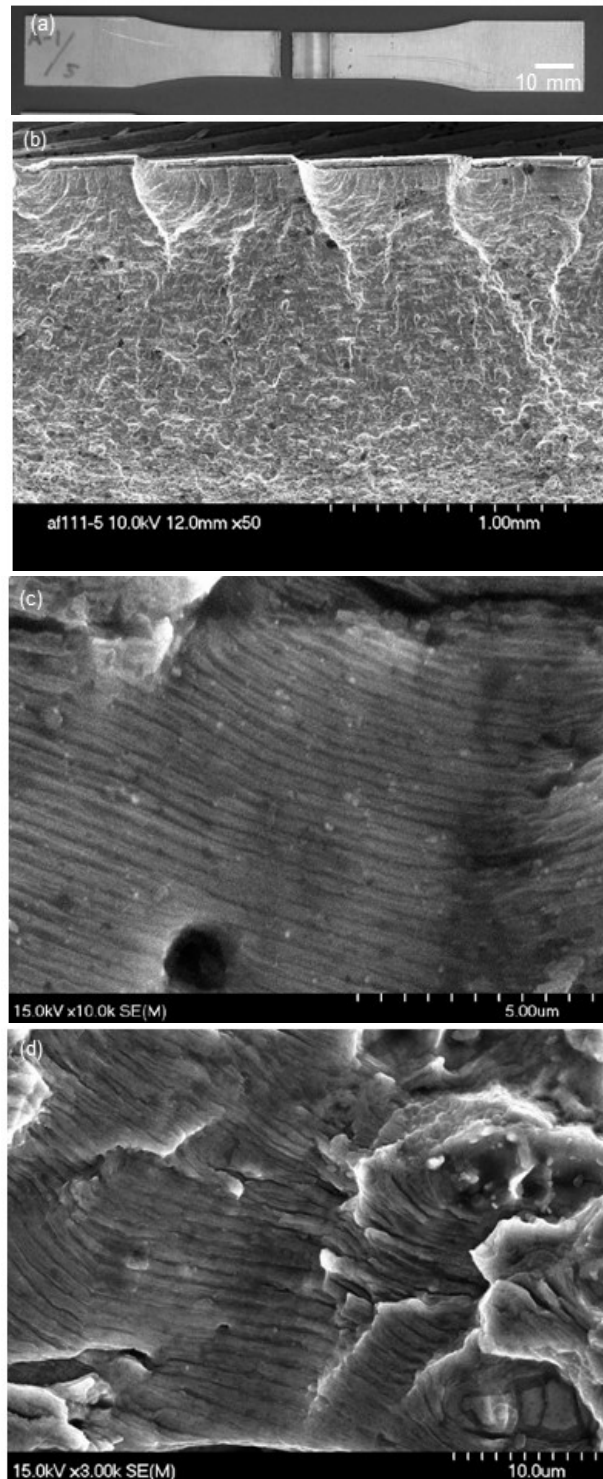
Fracture surface when the tool mark near the burr is the origin of fracture ( $\Delta\sigma = 225$  MPa, failed at 86k cycles) (a) top view, (b) fracture surface between the tool mark near the burr and the final failure surface, (c) 0.72 mm from the top surface, (d) 1.20 mm from the top surface
